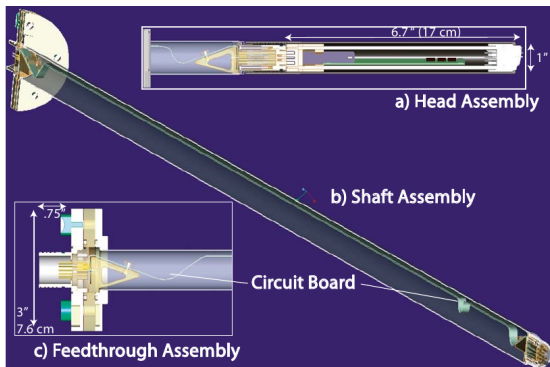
Head and shaft assembly used for NSTX tokamak. [38]
